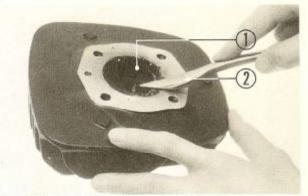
① Cylinder head combustion chamber ② Scraper
